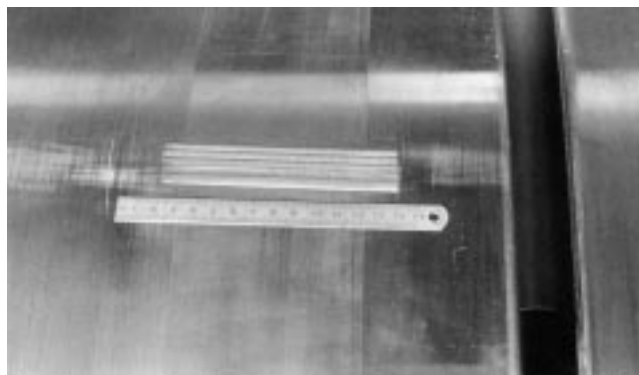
Detail of diesel engine component repaired by CO₂ laser cladding
